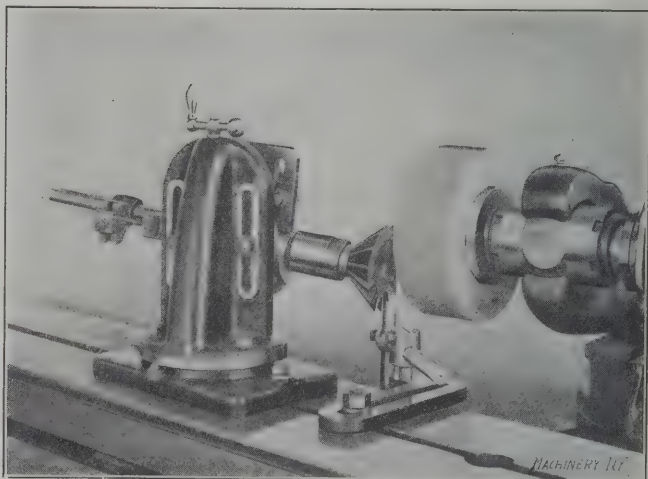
Grinding the End Teeth of an Angular Cutter, supported in the Vise
